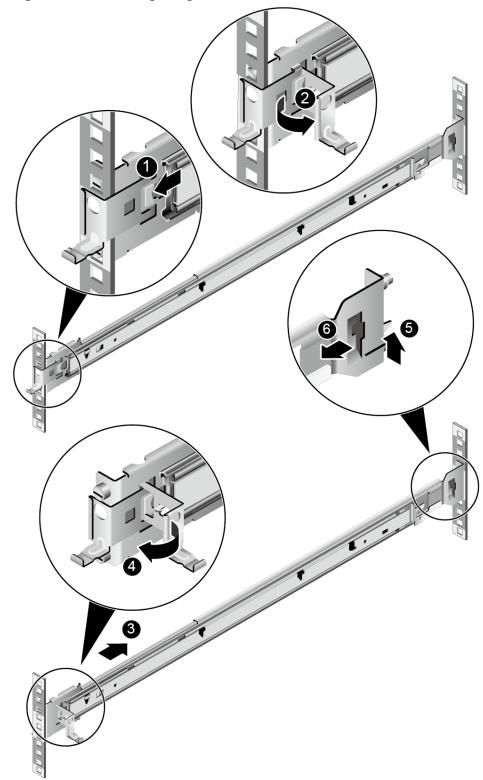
Removing the guide rail (BOM code: 21241258-002)
